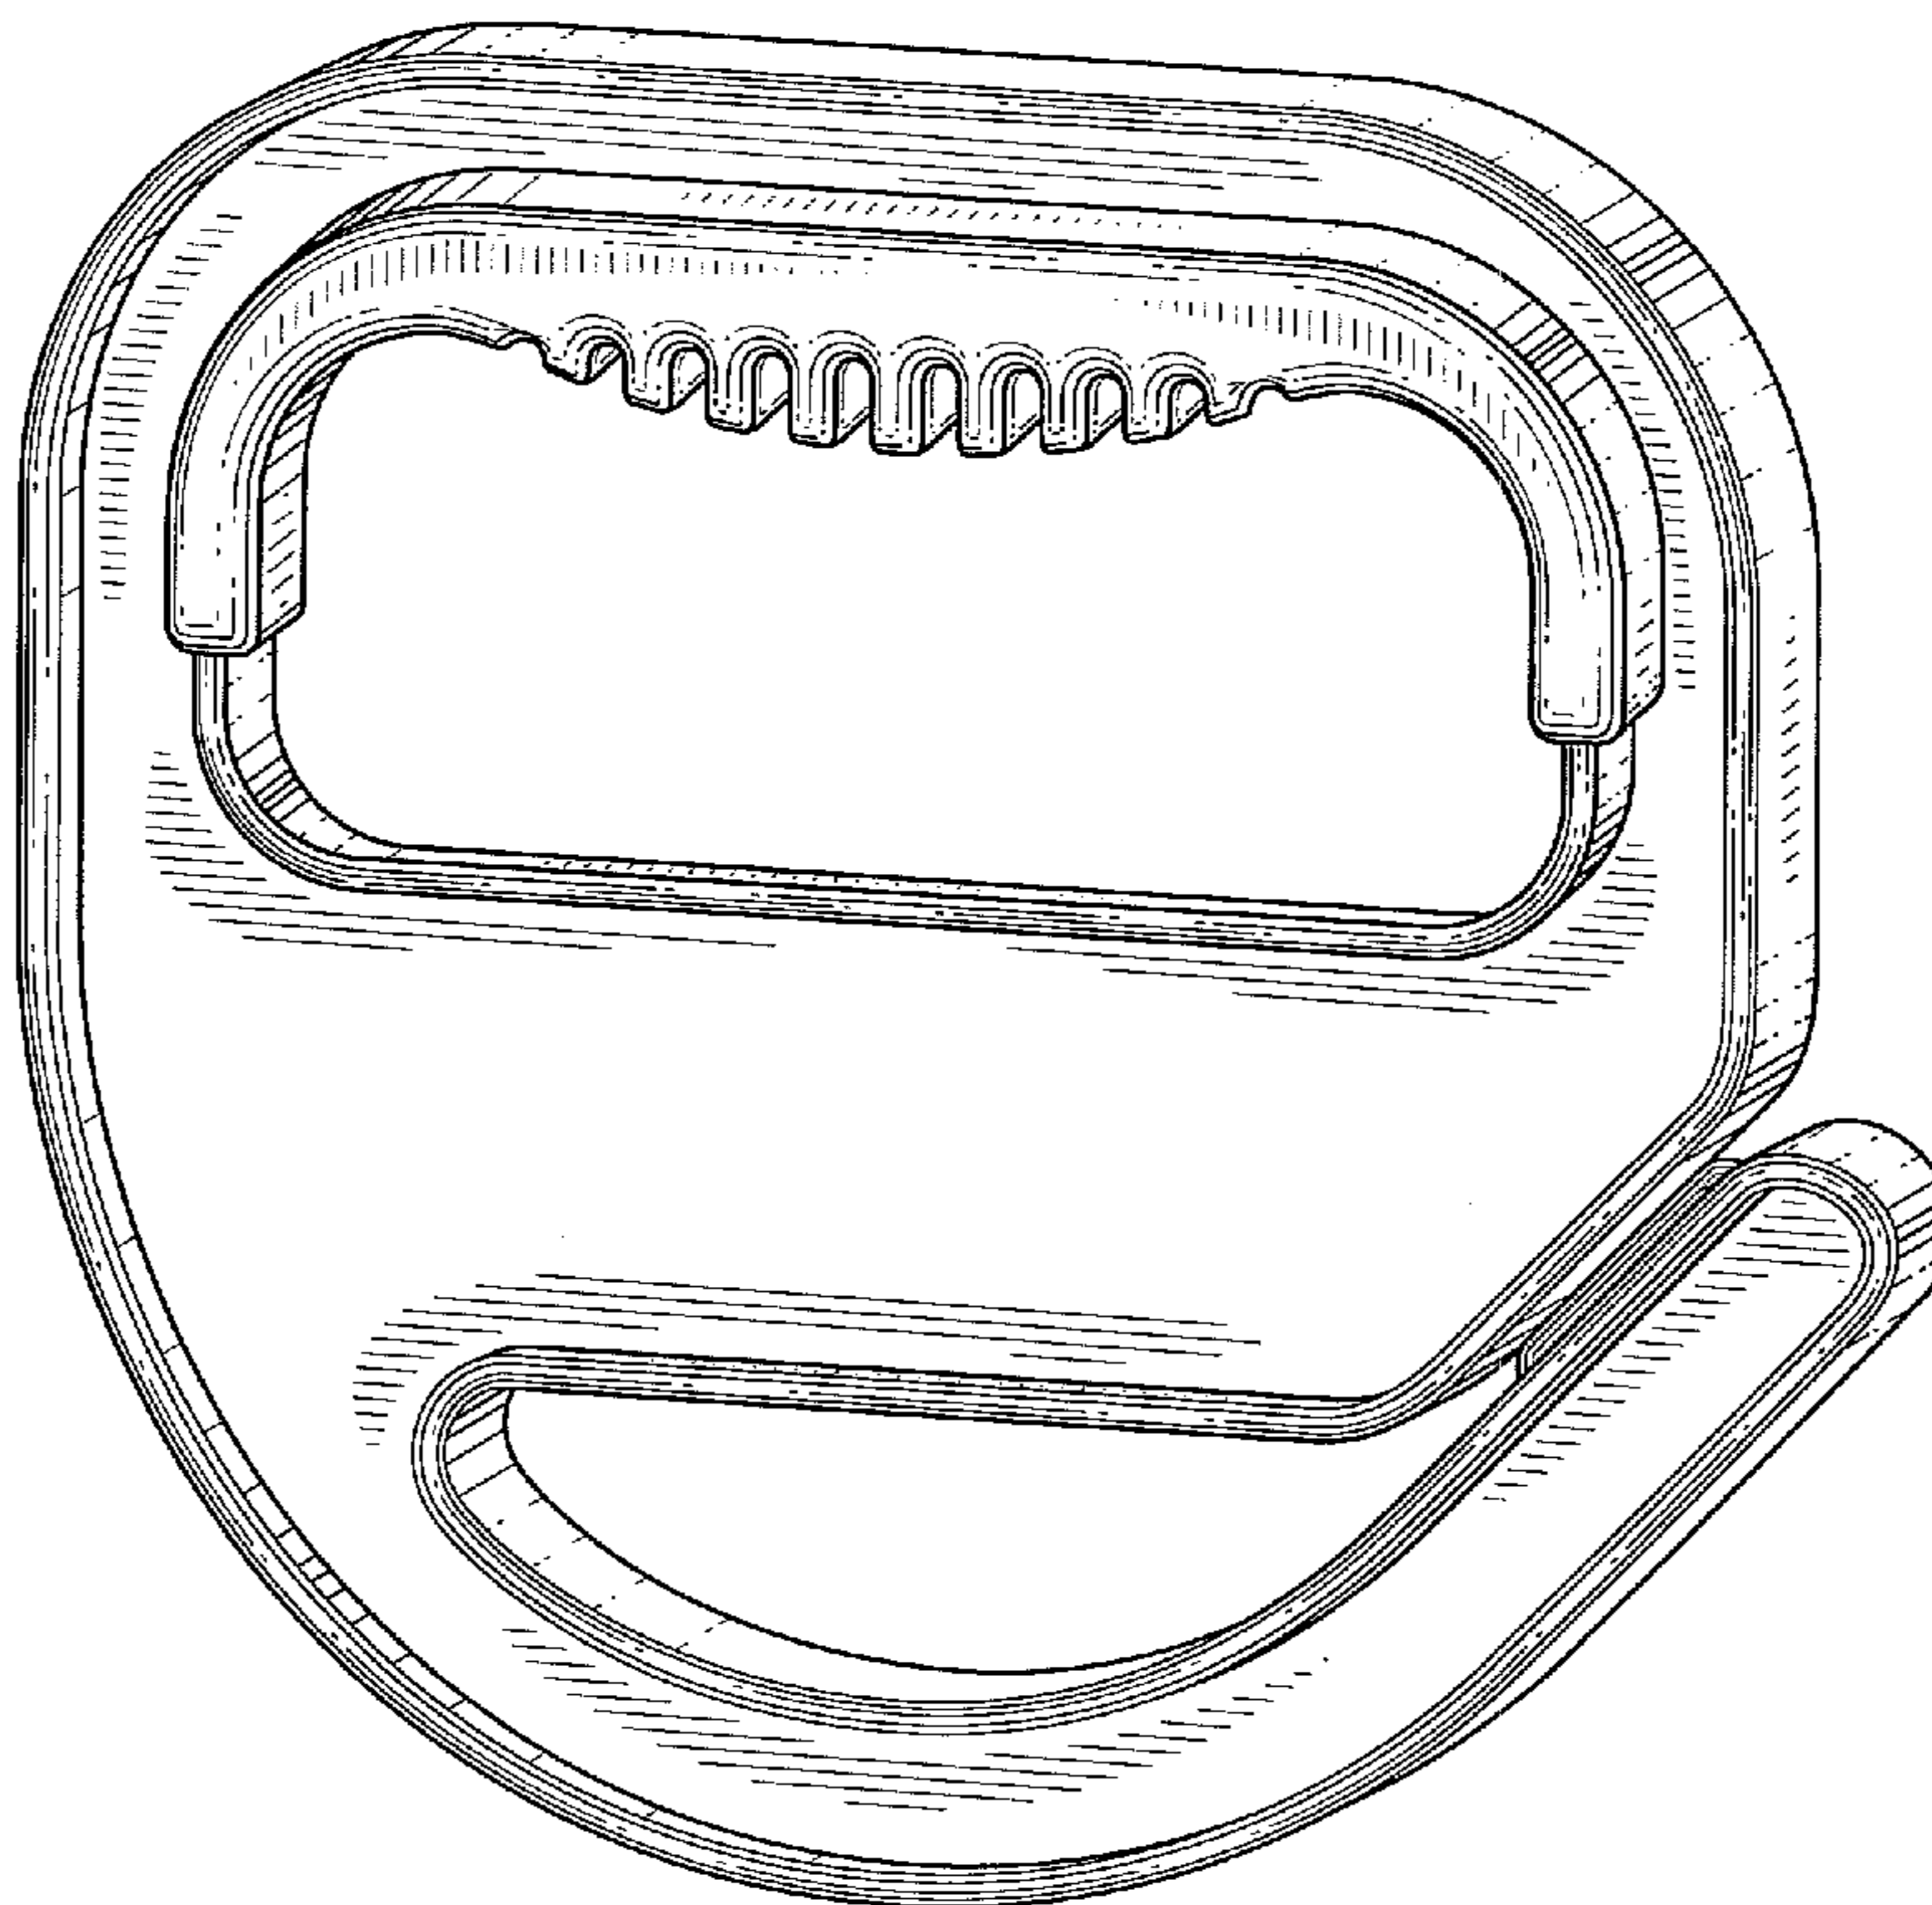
is a right side elevational view of the carrier of FIG. 1;
